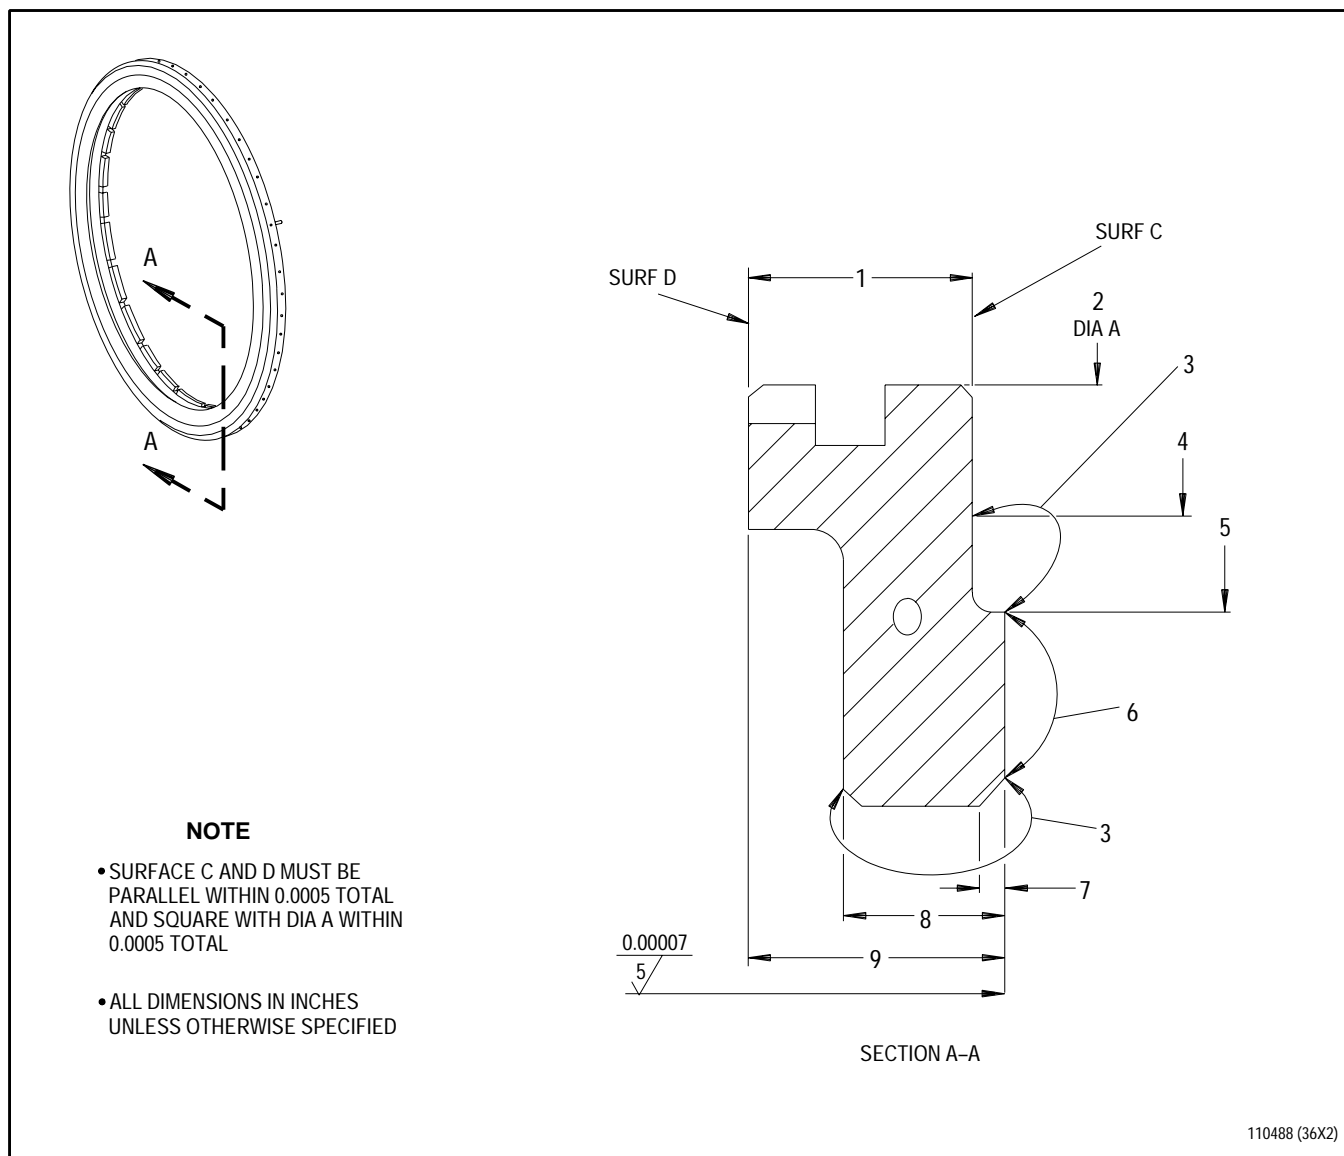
No. 4 Bearing Front Seal Seat - Flame Deposition Coating and Lapping Repair (PN 4032669)
